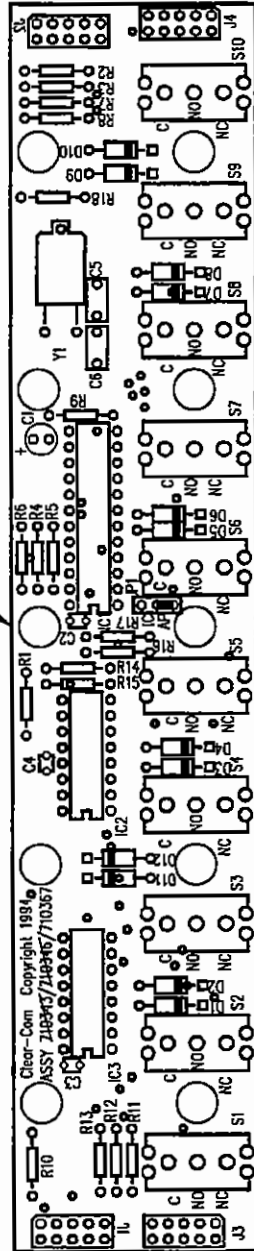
Assembly Drawing - AP-22 (IFB Assignment Panel) Rev. A
